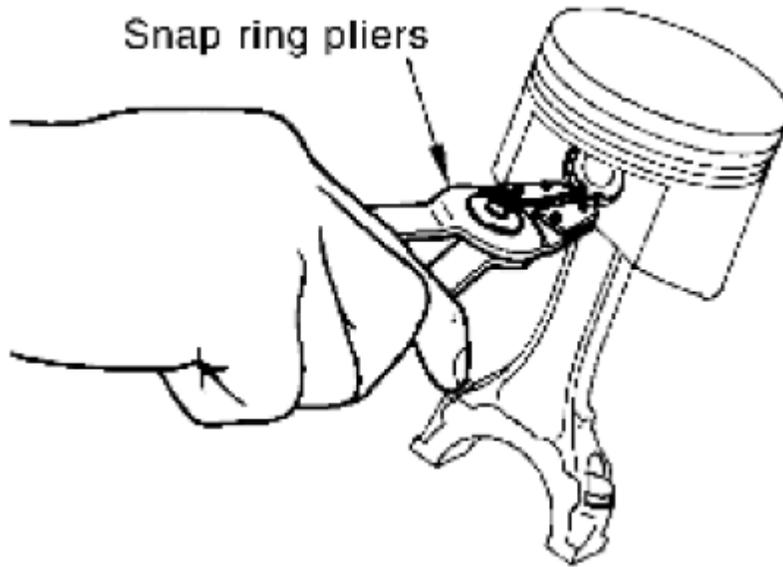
Removing Snap Rings Using Snap Ring Plier
